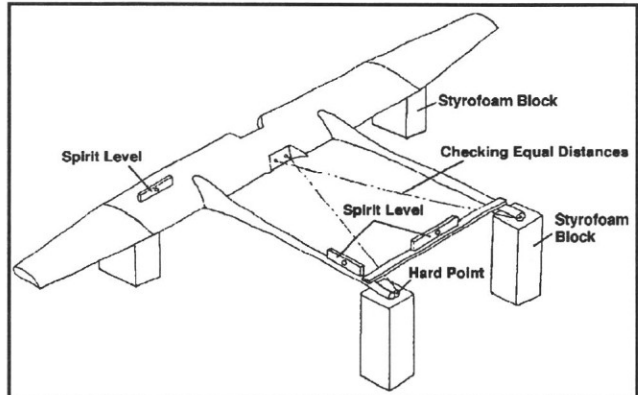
ASSEMBLY WITHOUT JIGS
